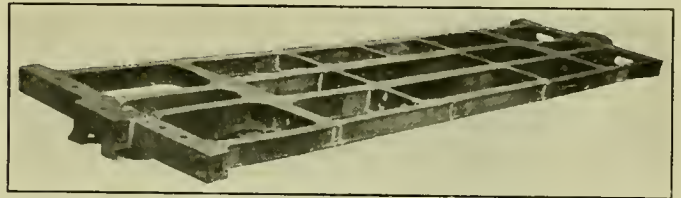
Large Tender Frame as Reclaimed by Welding
